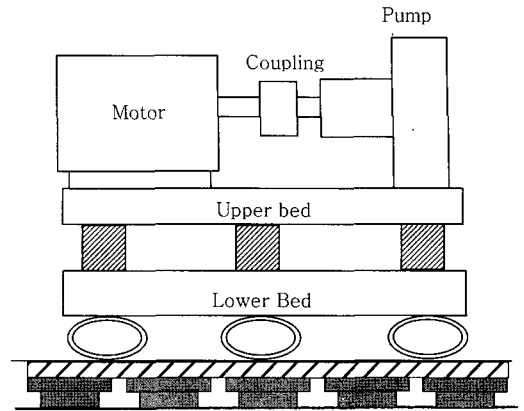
Double resiliently mounted pump/motor assembly on the bed plate lying on fixture plate.
